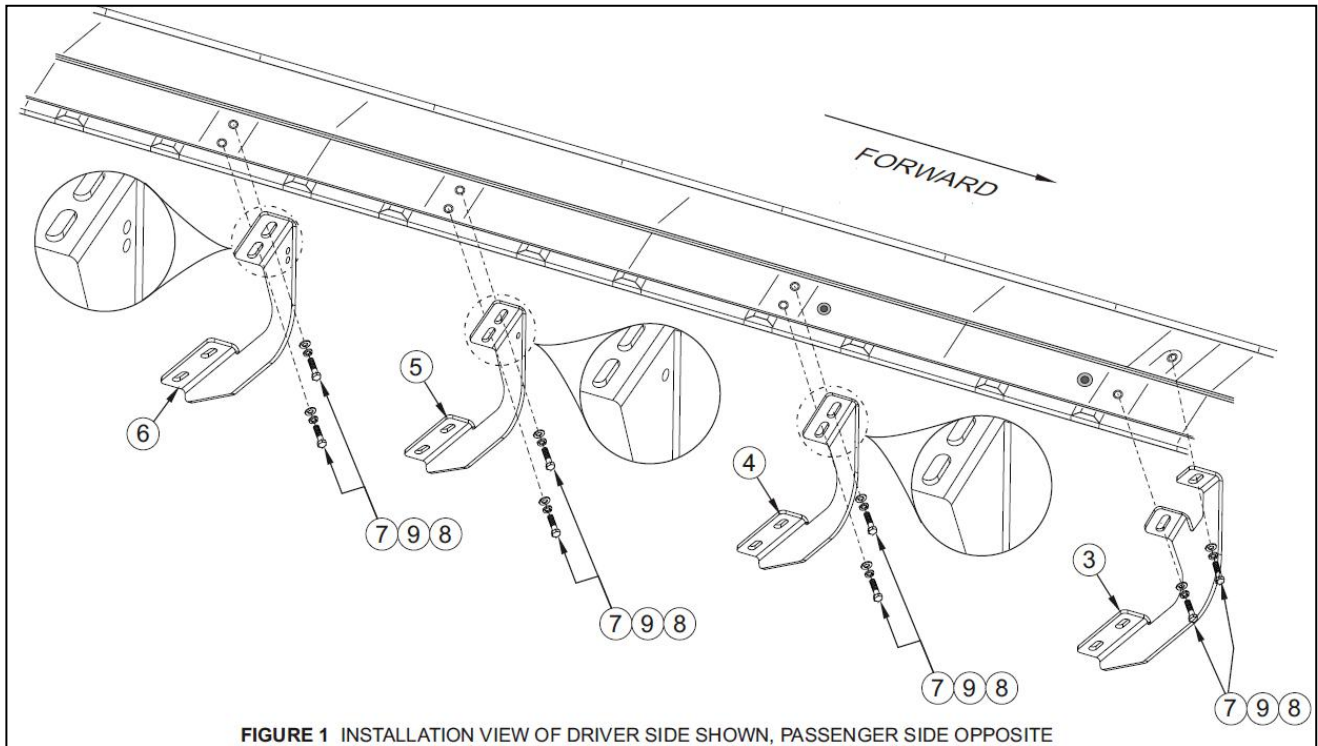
INSTALLATION VIEW OF DRIVER SIDE SHOWN, PASSENGER SIDE OPPOSITE
